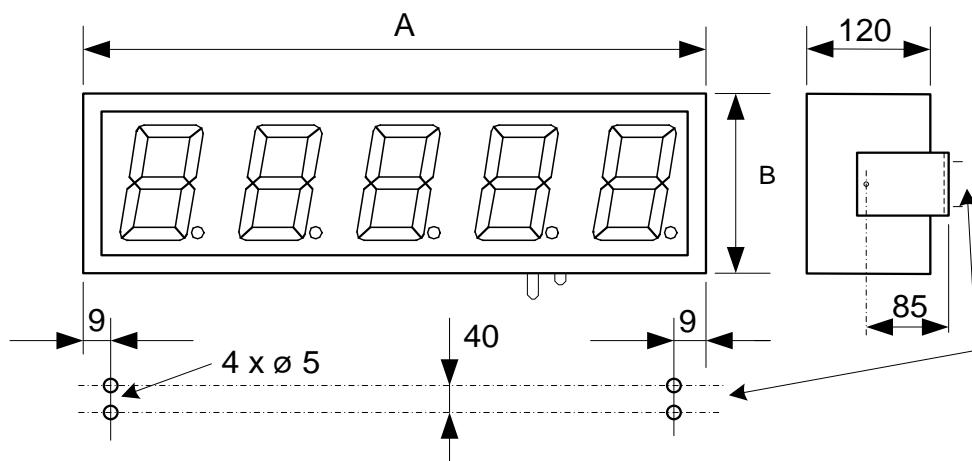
DN109 and DN119 drawing, plus wall fixing
